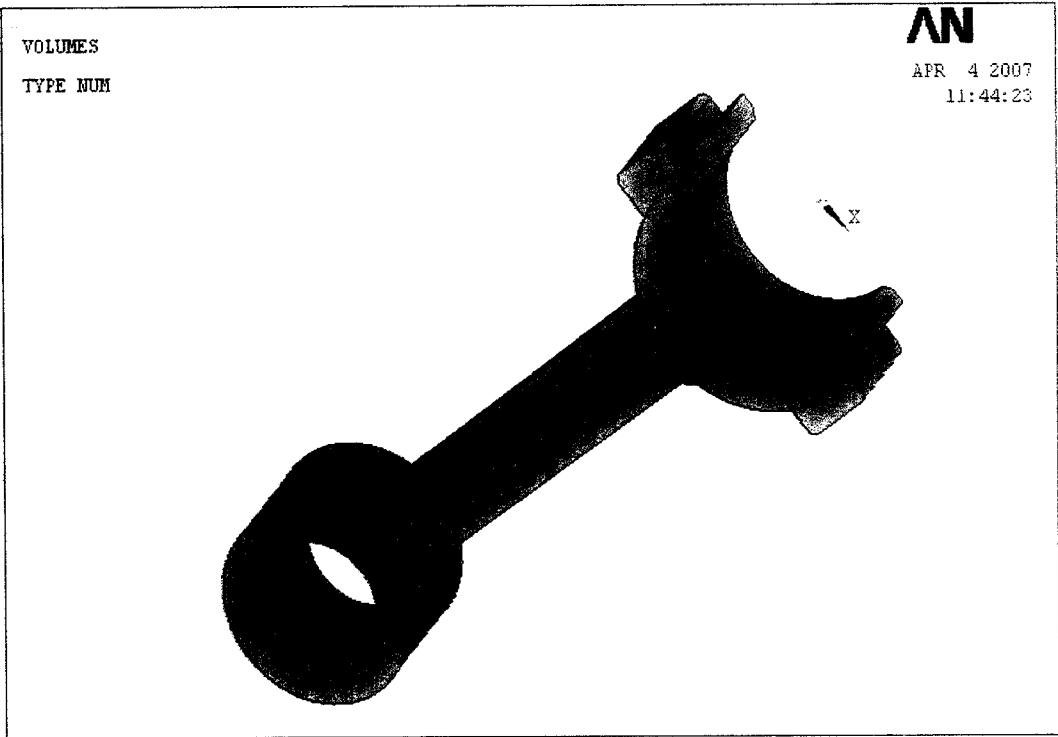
Imported CAD Geometry from PRO/Engineer
